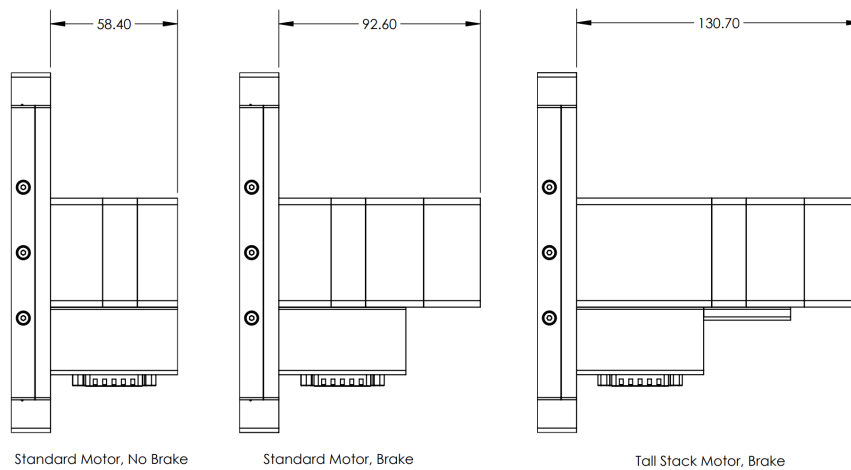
Dimension "D" LM3-BS Motor Dimensions
